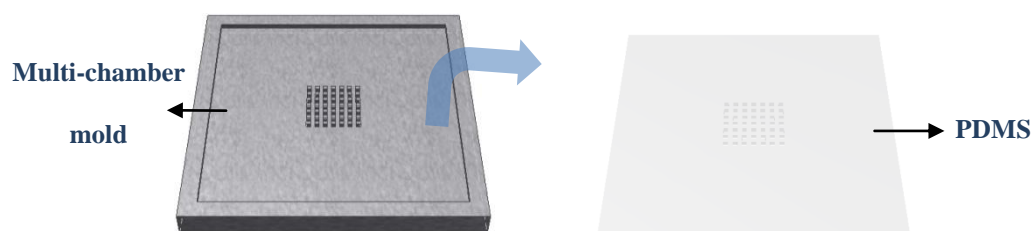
7X7 chamber mold used for casting PDMS through-hole part
